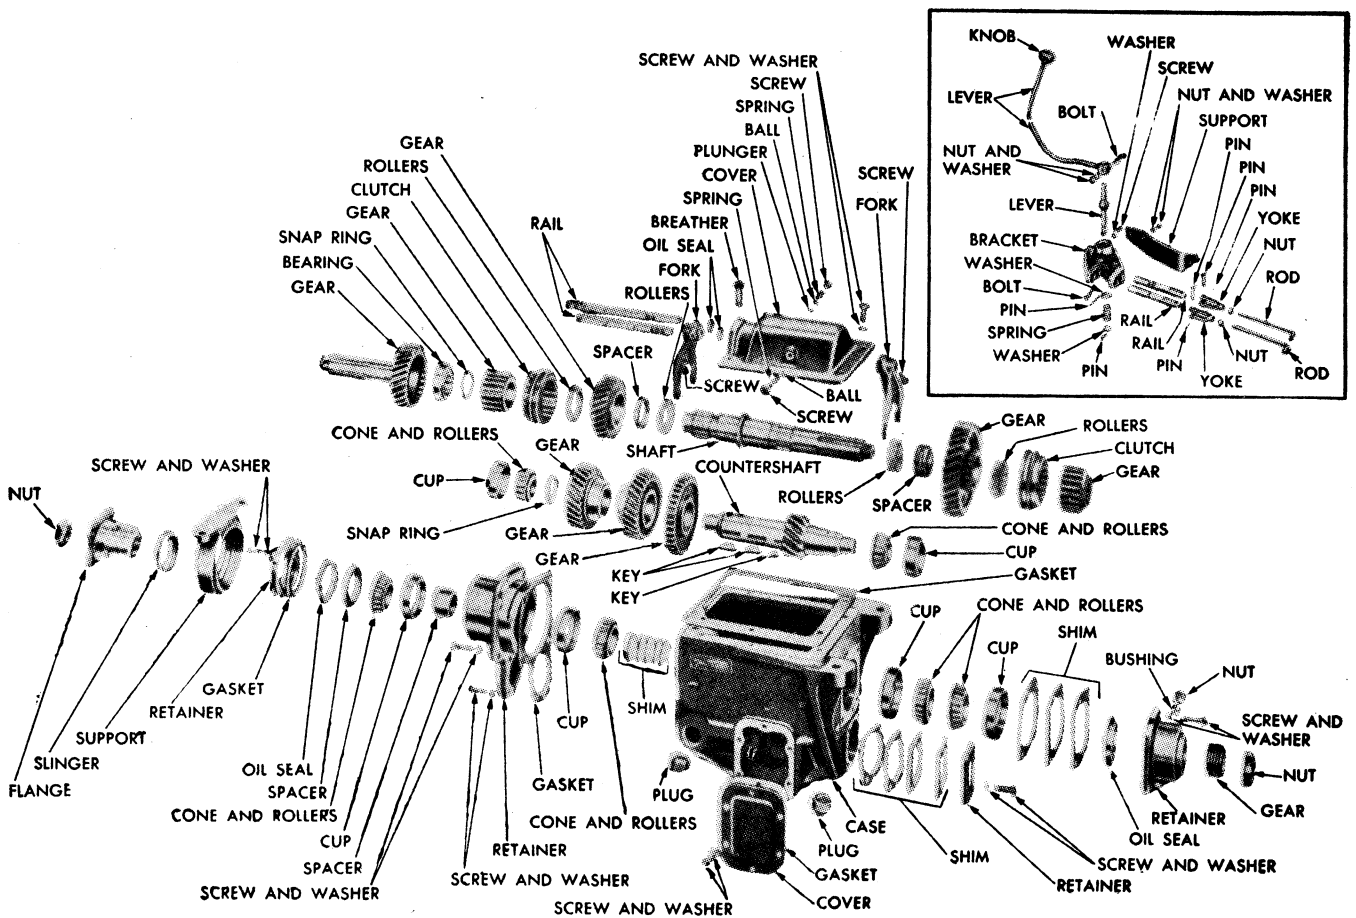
Spicer three speed auxiliary. Models 6031, 6231
